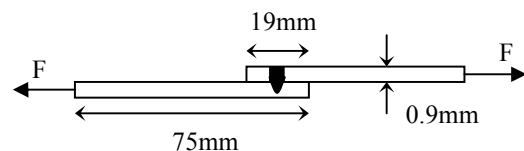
Tensile shear specimen size of the dissimilar lap welds, and direction of tension
